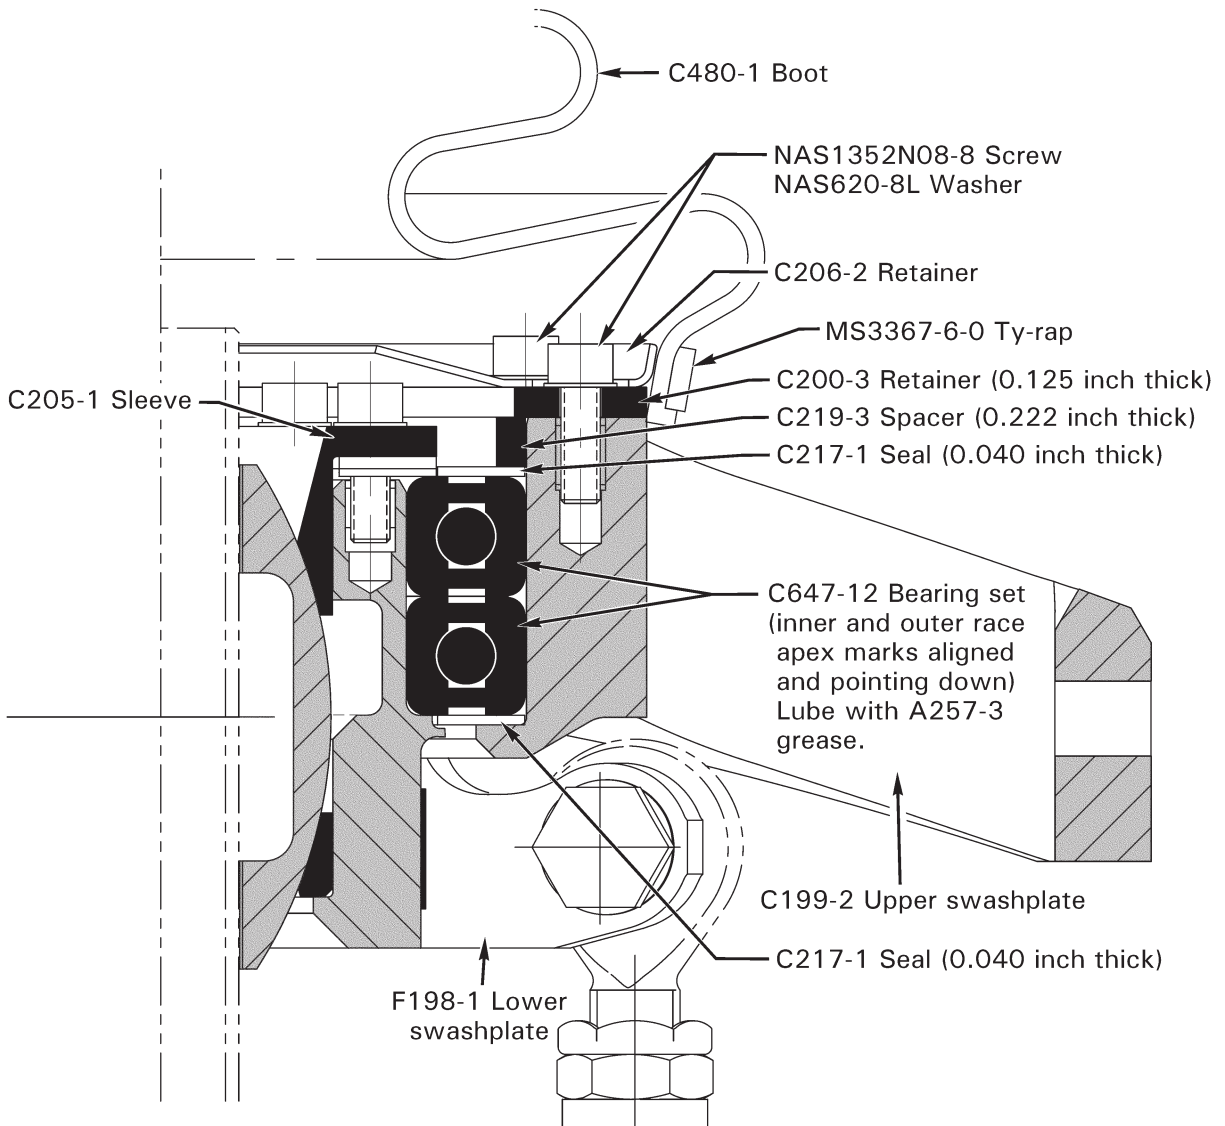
C017-6 REV AD OR LATER SWASHPLATE ASSEMBLY
